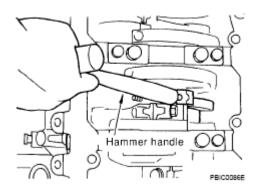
Pushing Connecting Rod Assembly Out To Cylinder Head
